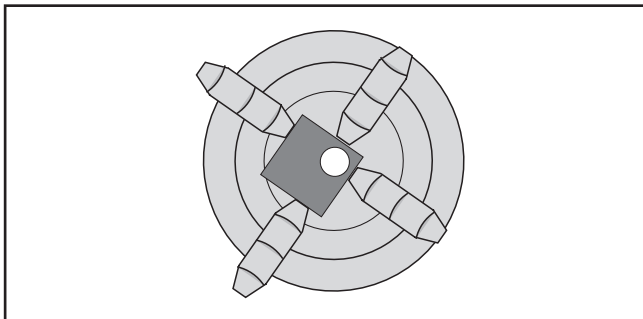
Four-jaw chuck independent jaw-clamping with two jaws reversed.
